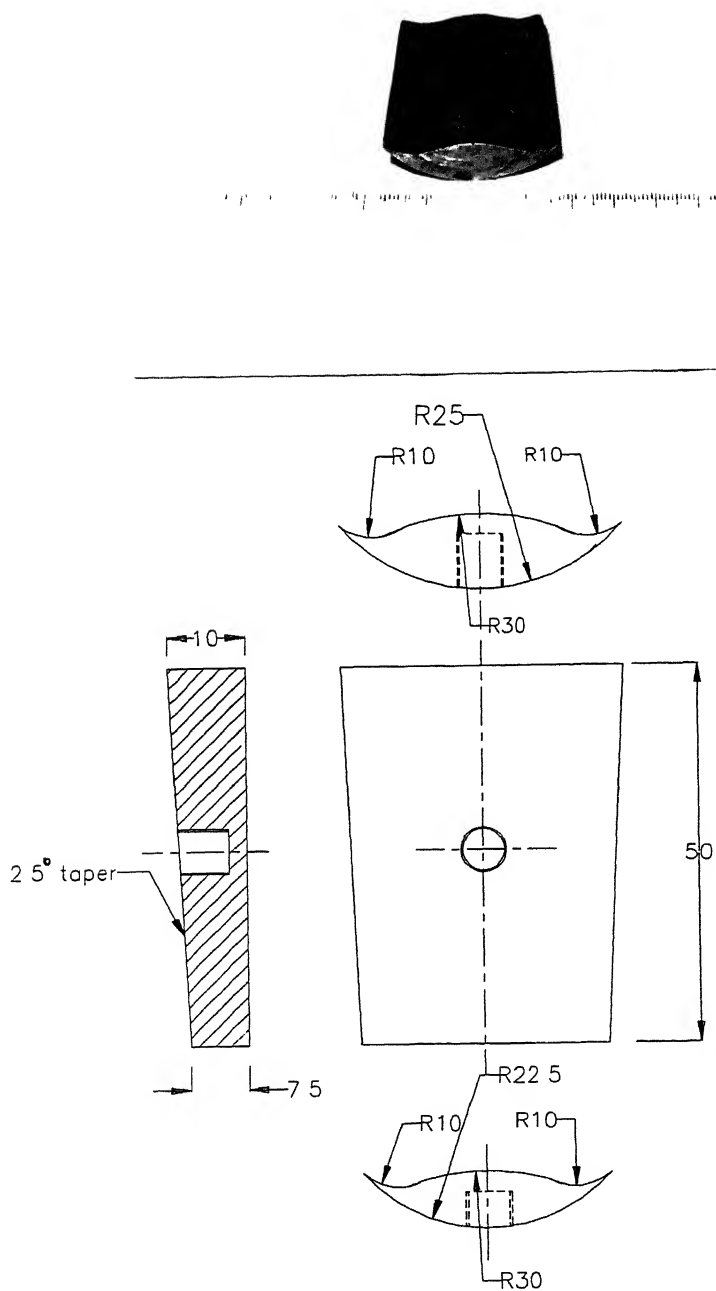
Photograph and drawing of The Insert for Convex-Concave surfaced product
